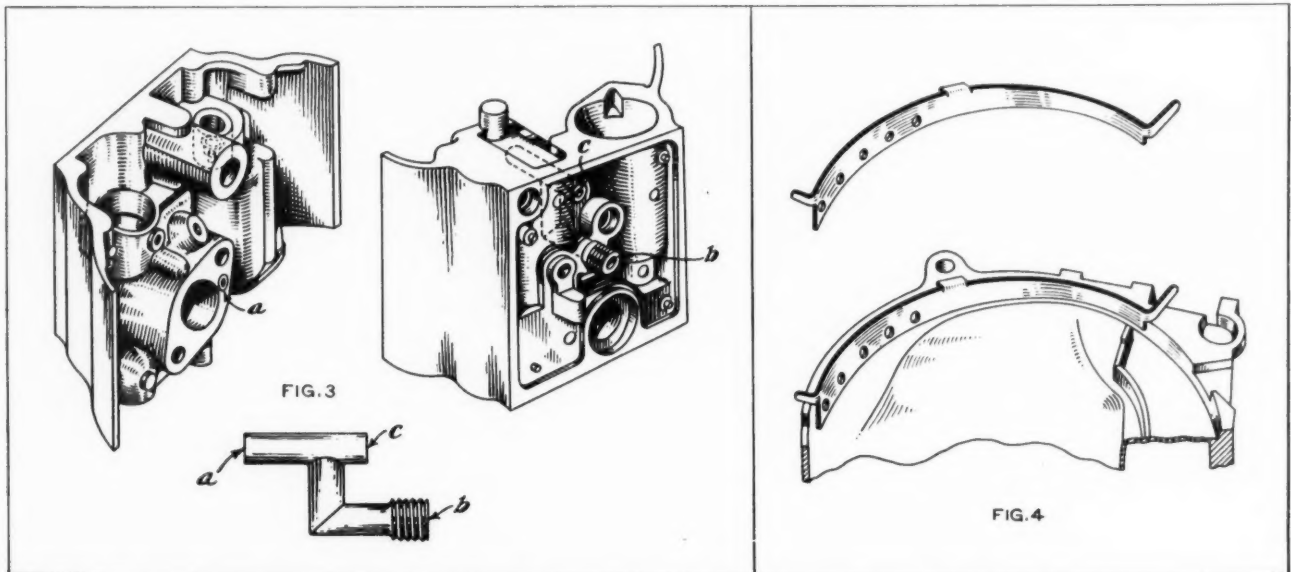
Aluminum Die-casting with Two Inserts, One of which, a Bronze Forging or Sand Casting, is Shown Separately. Corresponding Letters and Dotted Lines Indicate Its Location in the Casting. The Other Insert is a Screw Machine Part Shown Dotted Near the Top of the View at the Left
